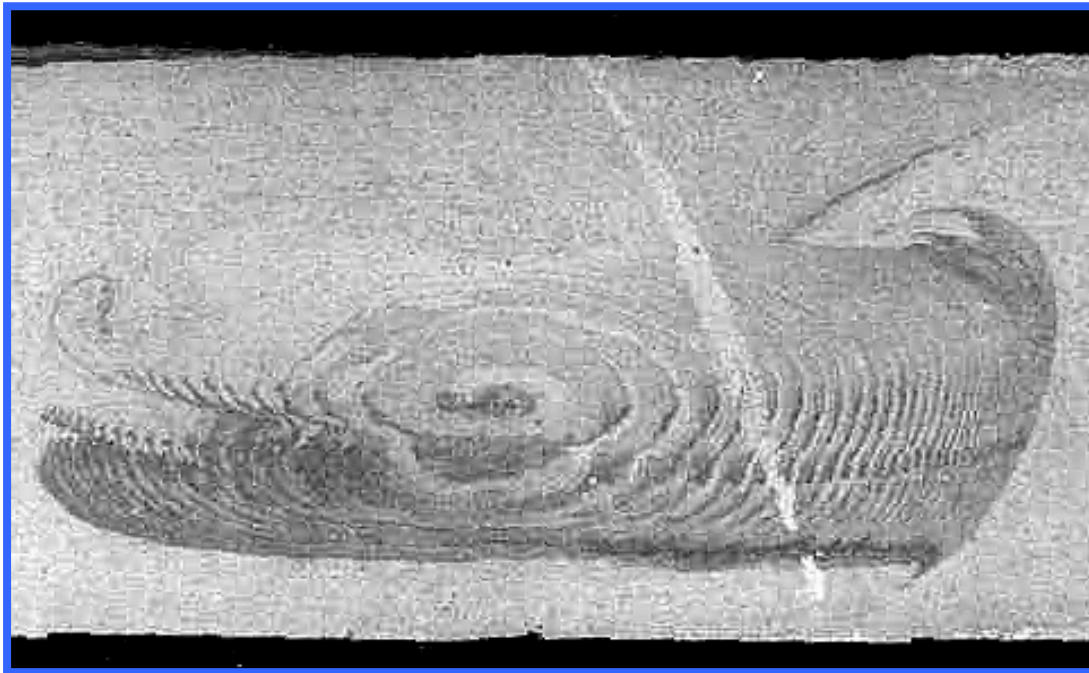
Nugget at Center of Friction Stir Weld
